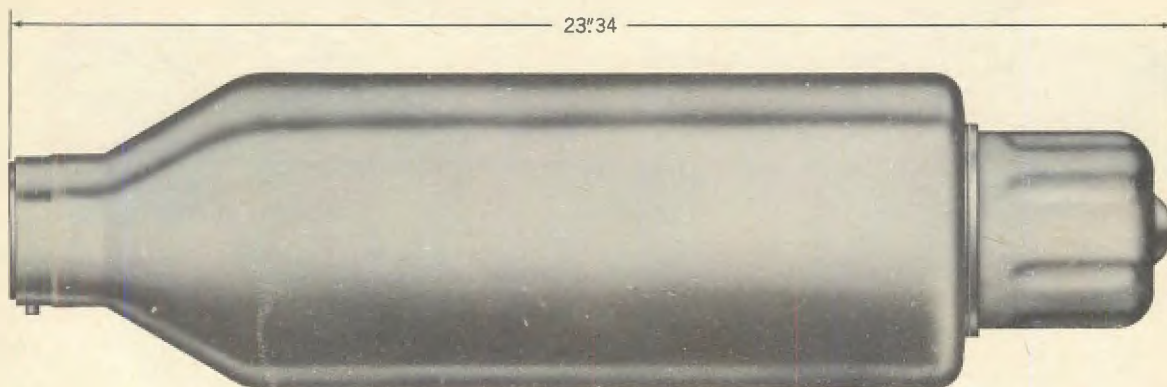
7.2-Inch Projector Charge Head Mk 4 Mod 0 (HE, ASW), External View.
